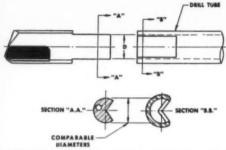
One of the two methods of brazing carbide drill ends to the drill tubes. Note, shank end of drill turned down to fit inside of drill tube.
